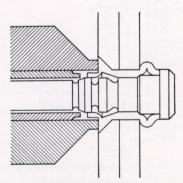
Sleeve is squeezed between head of pin and nose of gun upsetting sleeve end to form driven head on blind or backside of work.
